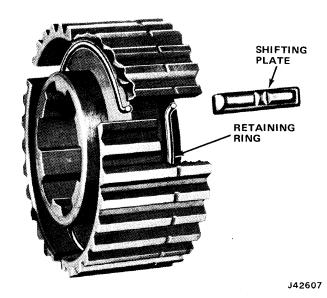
Shifting Plate and Retaining Ring Installation
